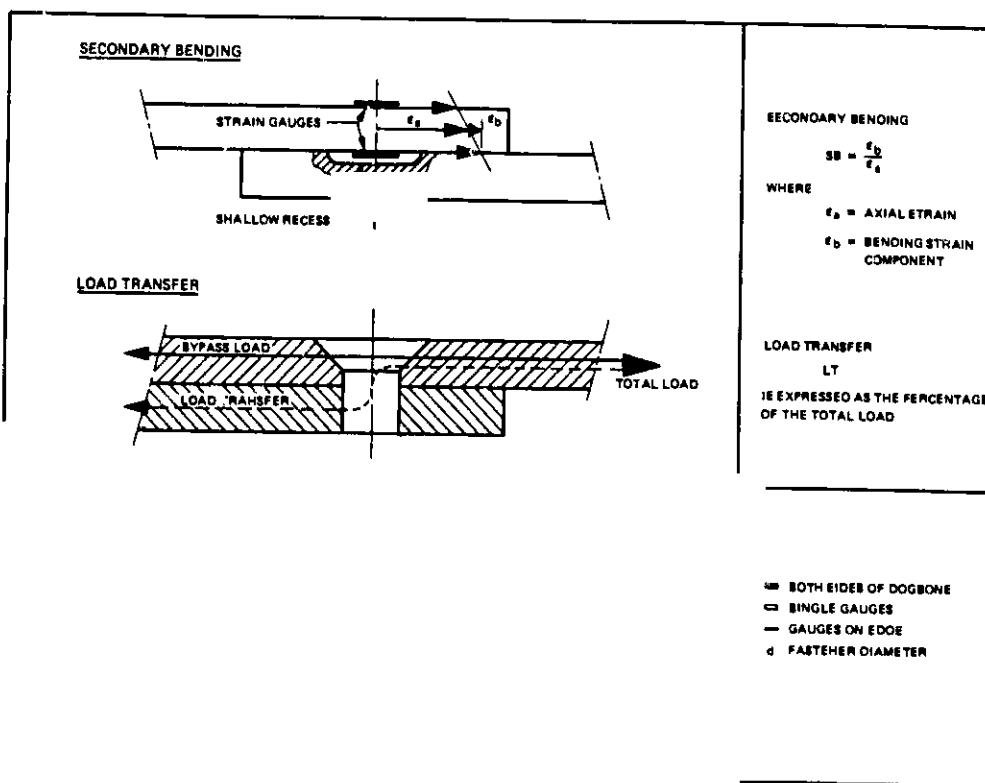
Secondary bending and load transfer. Definitions and position of strain gauges
